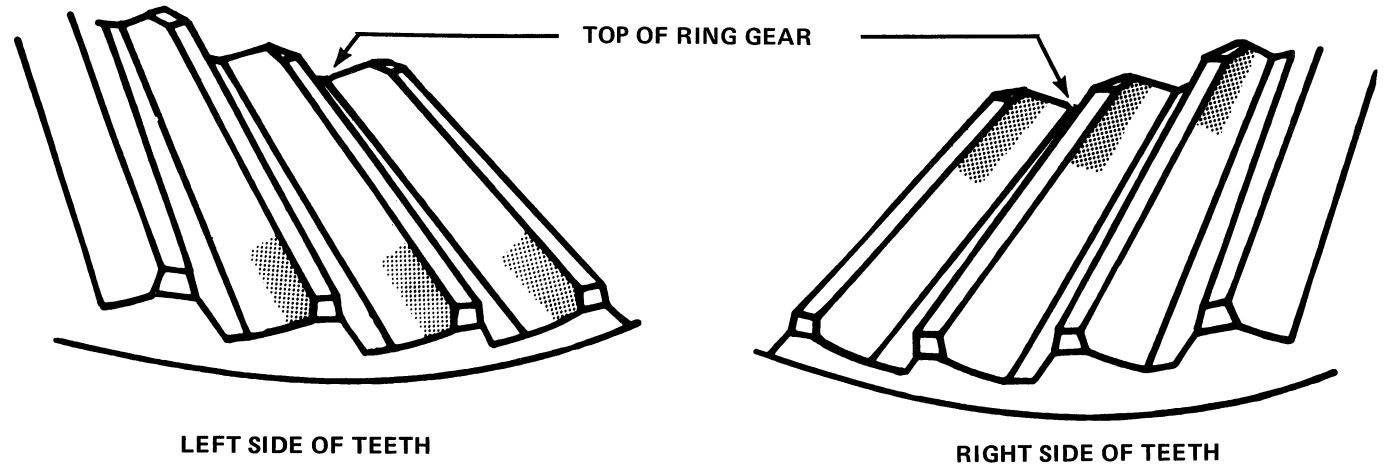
Incorrect Open Ring Gear Tooth Pattern
